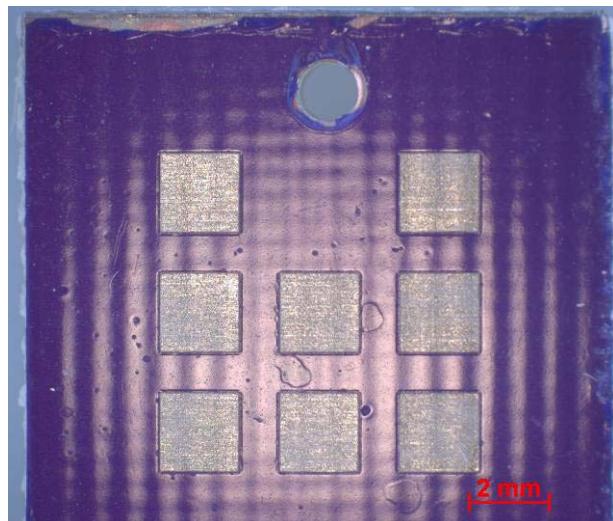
Photo lacquer substrate (printed circuit board) for the deposition
